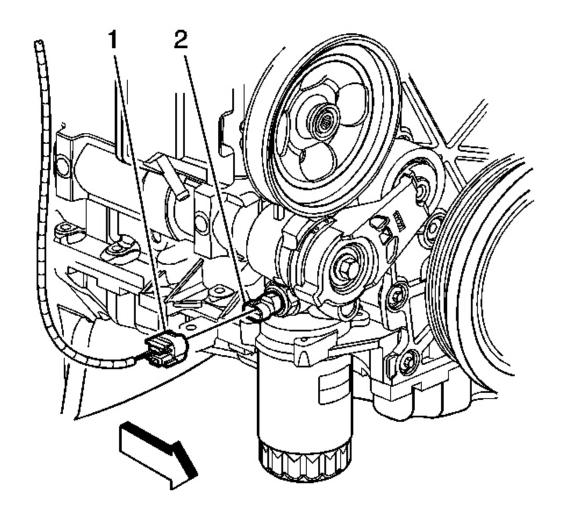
View Of Oil Pressure Switch Engine Wiring Harness Electrical Connector Courtesy of GENERAL MOTORS CORP.
